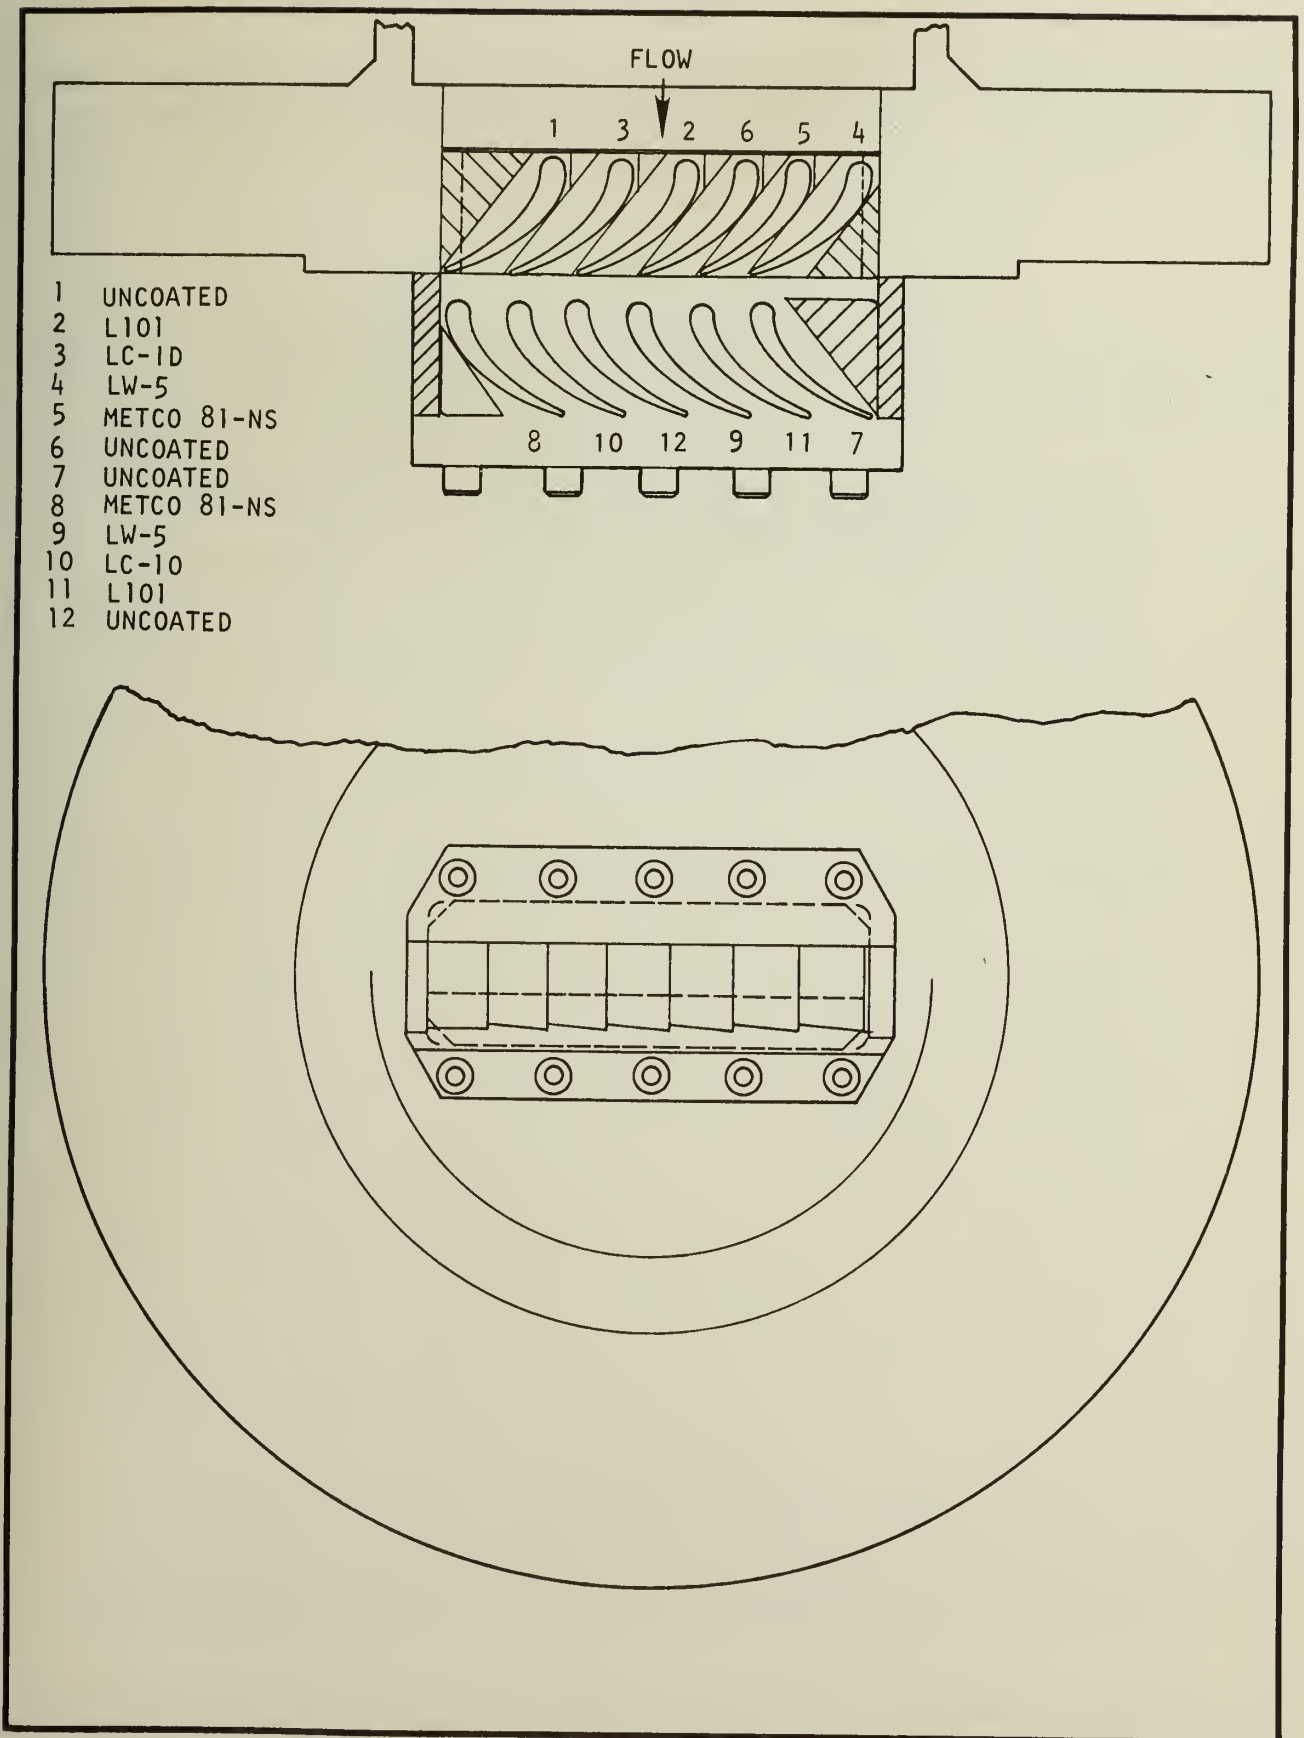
ARRANGEMENT OF BUCKETS IN ELLIOTT TURBINE TEST FIXTURE
